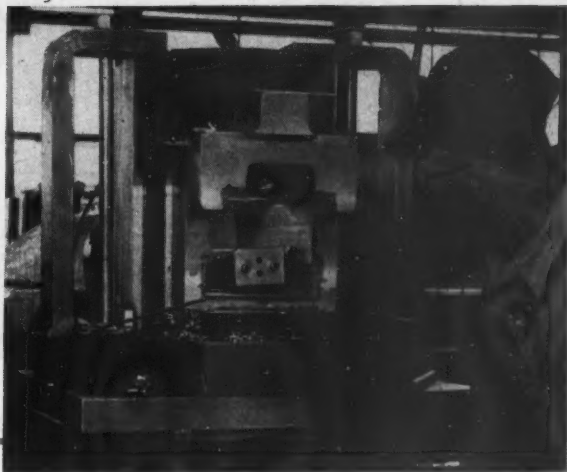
The Breech Recess is Machined in the Shaper, Using an Extension Toolholder
